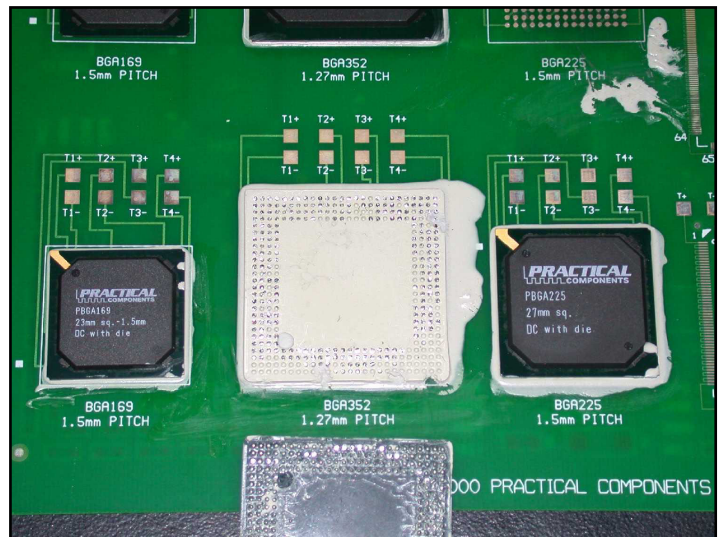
1.27mm pitch, 35mm blank center BGA removed after APTEK underfill installation. Photo demonstrates good flow characteristics.
